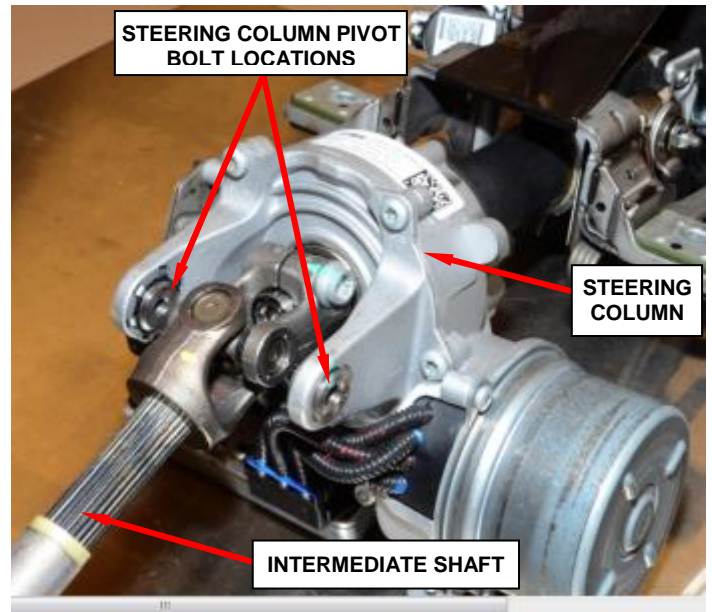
Steering Column Pivot Bolts (Steering Column Removed for Photographic Purposes)
